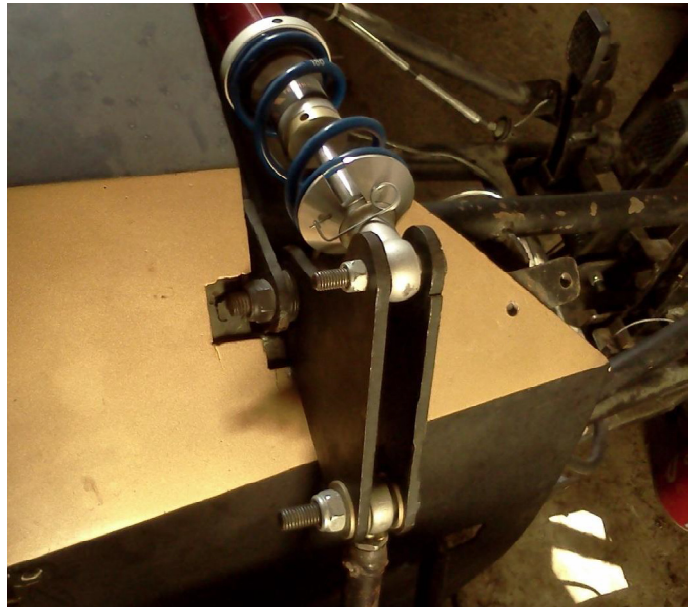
Bell crank lever Assembly (Mehta 2013)
